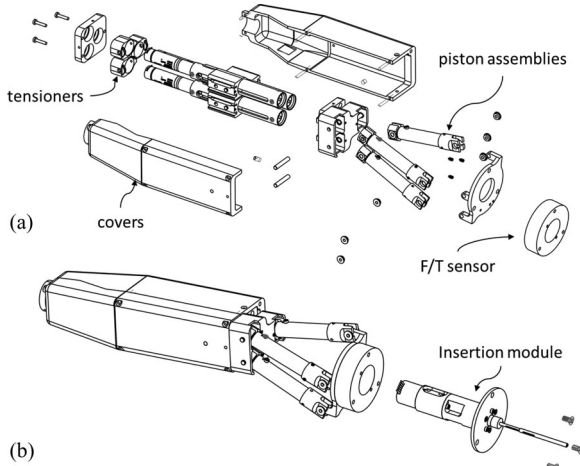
Prototype Assembly. (a) The 3-DoF wire-actuated platform was assembled with the force/torque sensor attached as shown. (b) The insertion module is attached separately.
